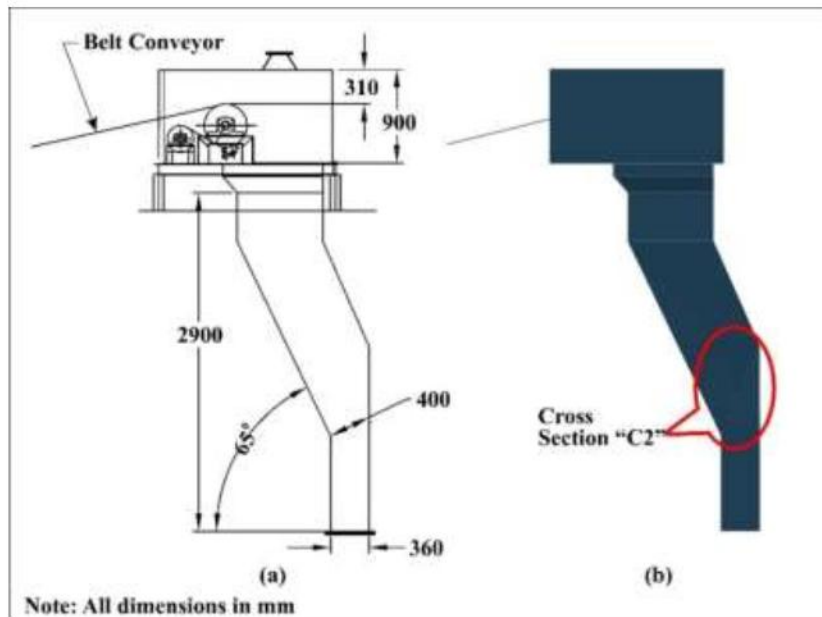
(a) 2D drawing and (b) CAD model of modified chute design-1
